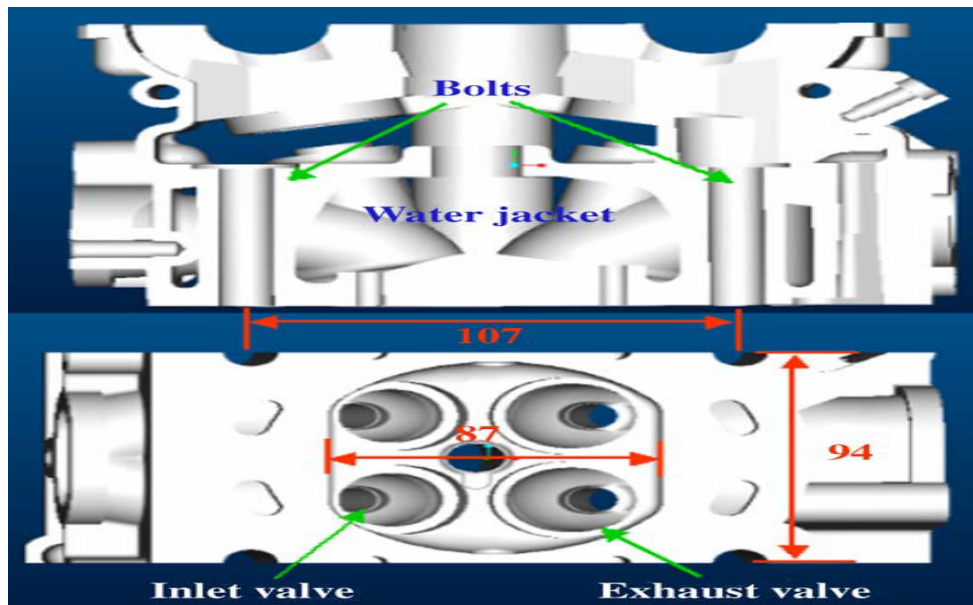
The relative dimensions of the 2.0 L 2nd cylinder head (mm)
